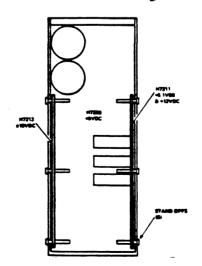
POWER SUPPLY REGULATOR REMOVAL
